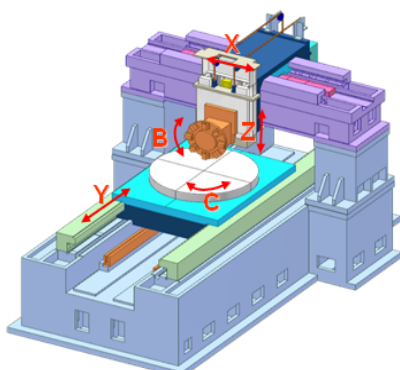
Design of Large-Surface Micro-Grooving Machine
